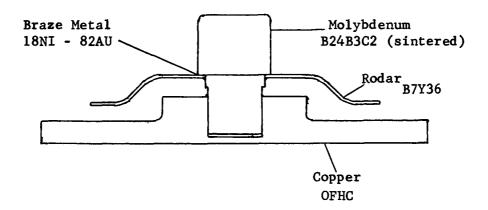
Sketch of Brazed Vacuum Capsule Contact Assembly.
